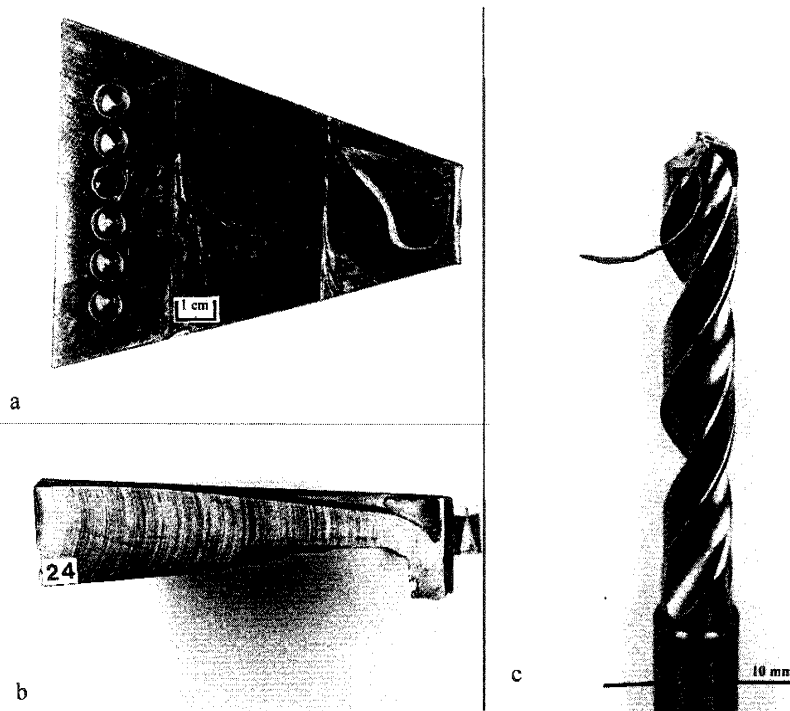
(a, b) The workpiece of stainless steel with NiTi coating used in drilling tests and (c) a TiN-coated \varnothing 8.5 mm solid carbide drill used in drilling tests showing chip buildup on the cutting edge.
